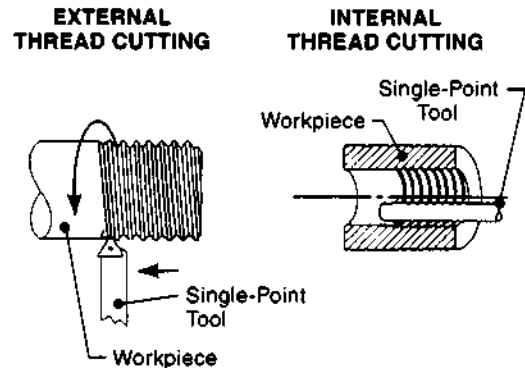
E3 Single point machining of external and internal screw threads. (from *Manufacturing Processes Reference Guide*, R.H. Todd, D. K. Allen, and L. Alting, Industrial Press, New York, 1994.)
